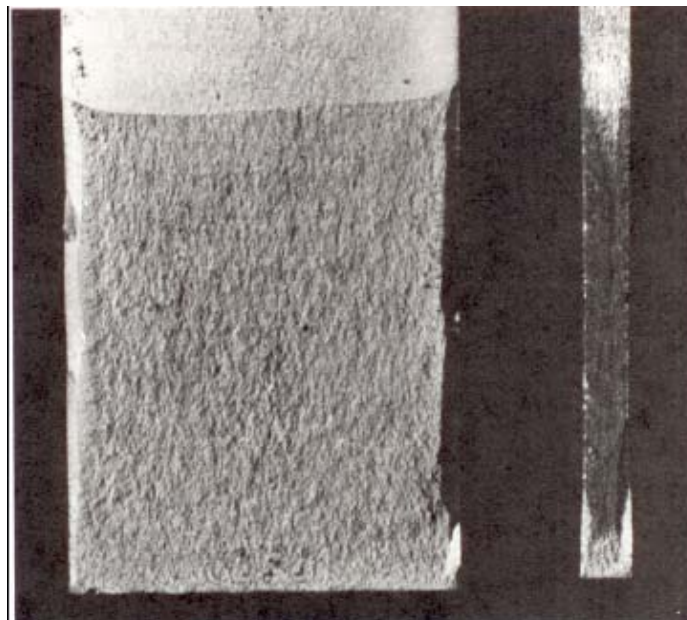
Flat (left) and slant (right) fracture surfaces.
